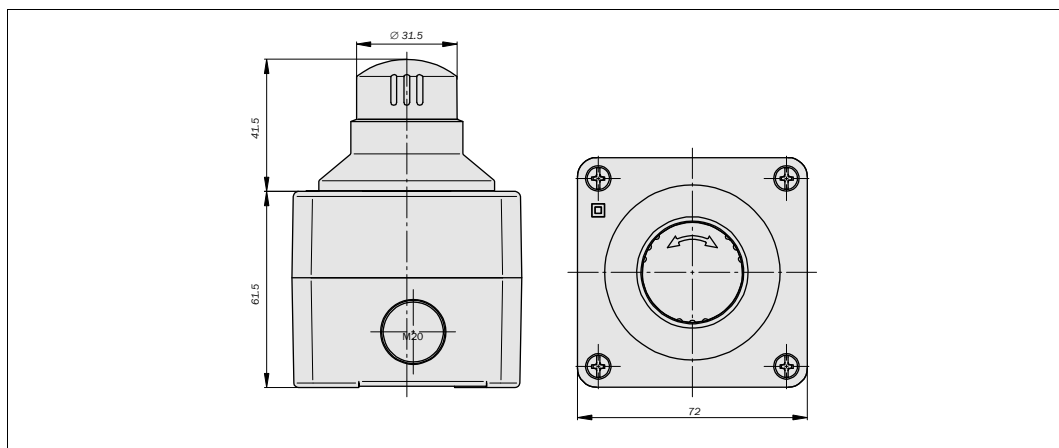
Dimensional drawing for the surface-mounted version (mm)
